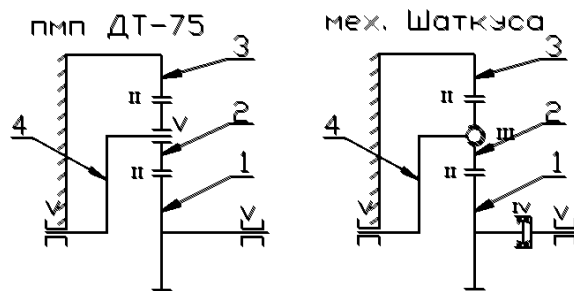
PRM DT-75 and the modified mechanism of Satkus: 1-sun gear, 2-satellite, 3 - ring gear, 4 - carrier.
